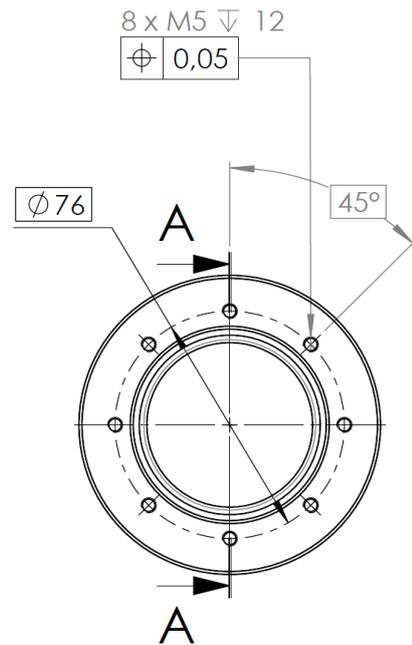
Initial tolerance of true position - spindle pipe
